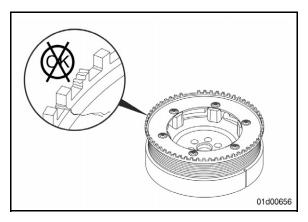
INSPECT THE CRANKSHAFT SPEED INDICATOR RING
